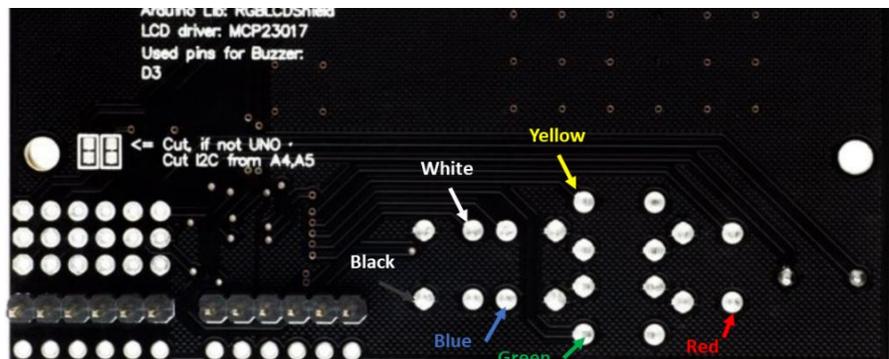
Where to solder the Keypad wires on the back of the LCD Display
